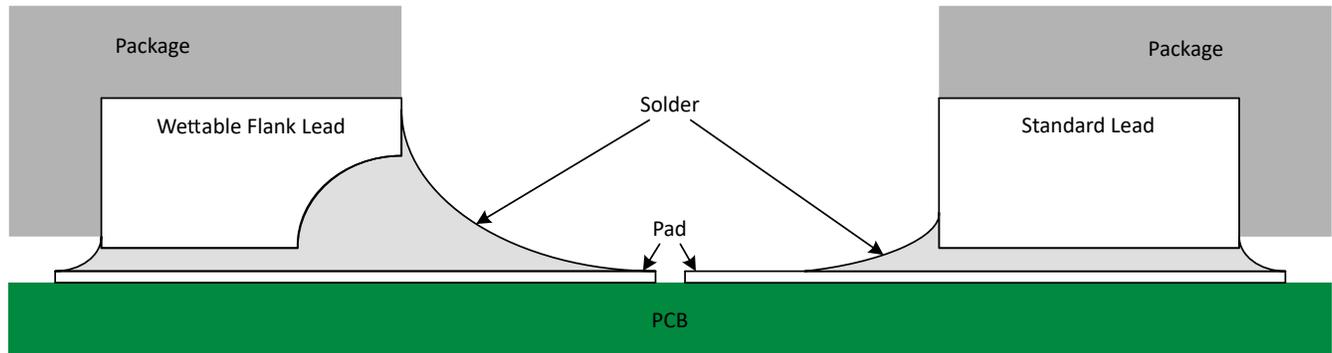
Simplified Cutaway View of Wettable-Flank QFN Package and Standard QFN Package After Soldering
